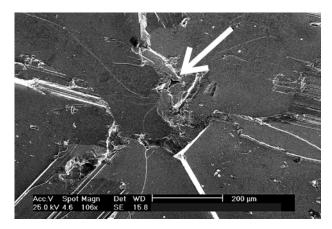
Fracture surface of a HCF specimen of alloy *ExAl7*. The arrow indicates a casting pore which acts as the crack initiation site.
